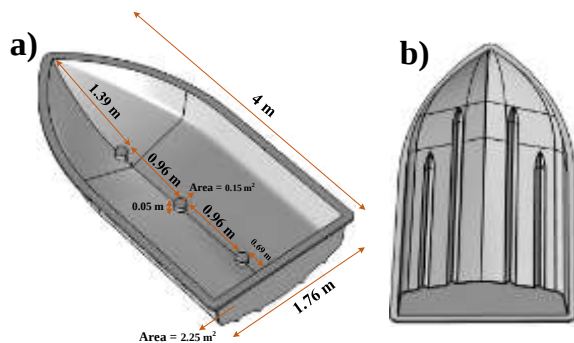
Geometry of small vessel hulls with three cylindrical inlets: a) isometric view; b) back view.
